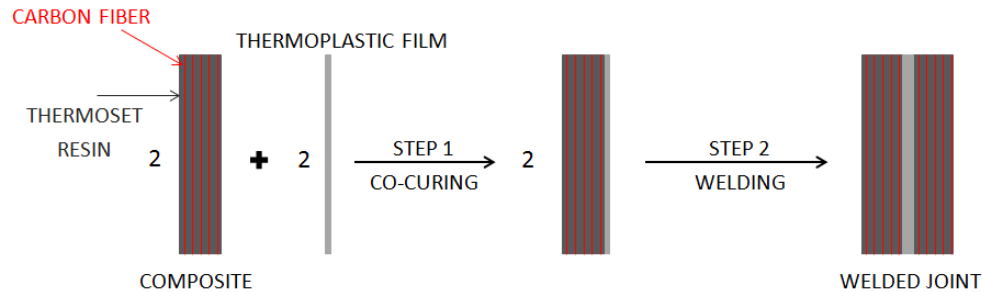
Schematic view of the thermoset composite welding process: the first step consists in co-curing the uncured thermoset composite with a thermoplastic layer at its surface. The second step is the thermoplastic welding of two co-cured parts by partial fusion of the thermoplastic layers.
